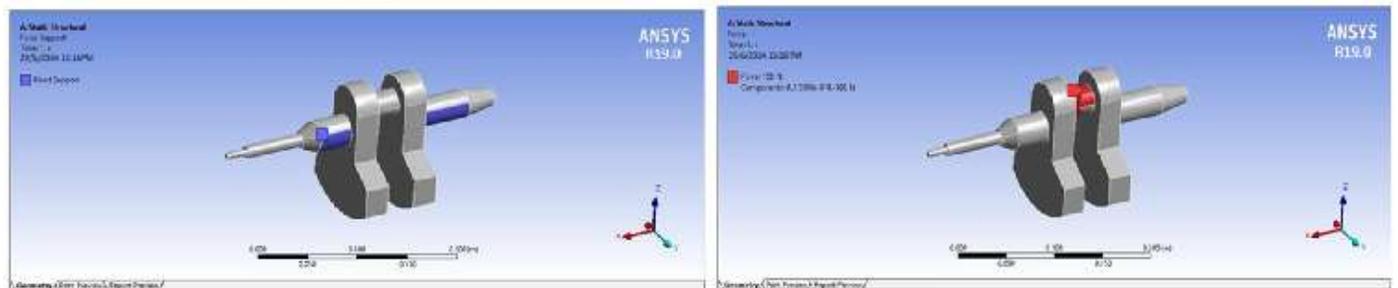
Fixed support of Crank Shaft & Load –force 100 N
